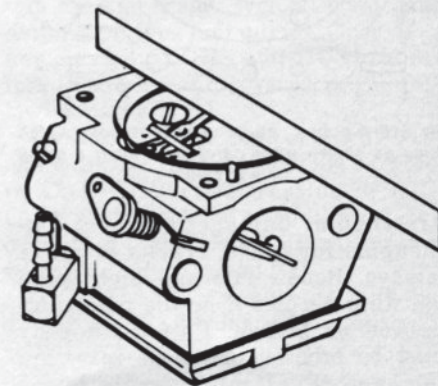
Diaphragm lever on model HDC should just touch a straight edge laid on carburetor body as shown.
